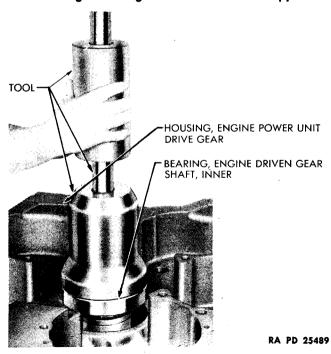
Driving Engine Driven Gear Shaft Inner Bearing
